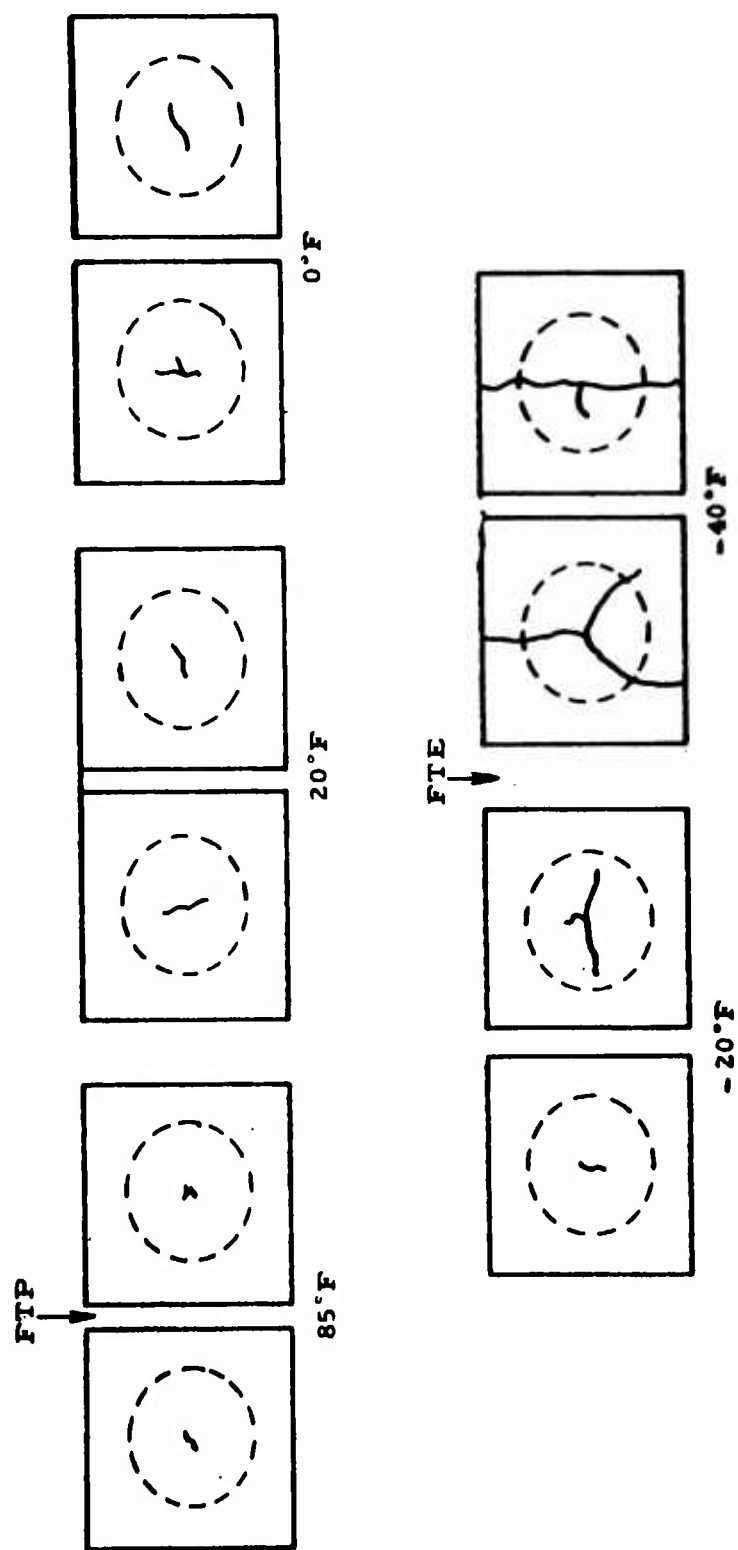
EXPLOSION CRACK STARTER BULGE TEST RESULTS OF STEEL 9
